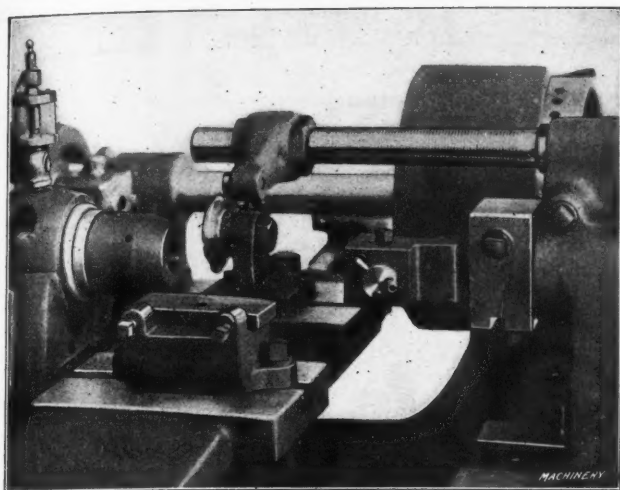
Illustration showing Application of Taper Turning Tool presented in Fig. 13
